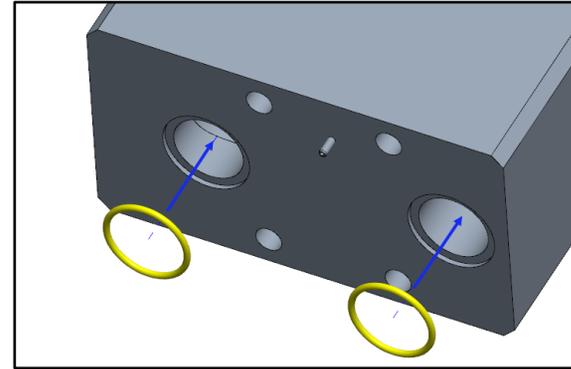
O-rings Installation into Shuttle Valve Manifold
